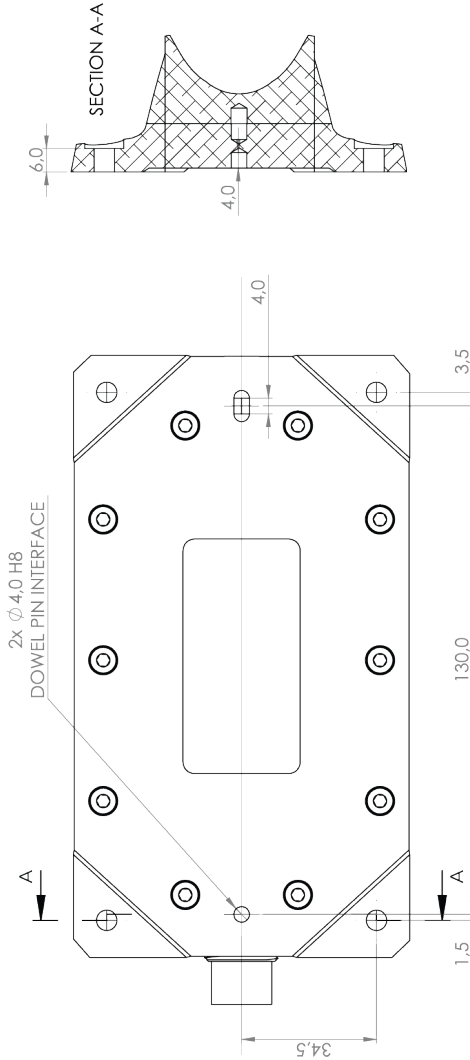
MRU Marine S / MRU Marine HS technical drawings: bottom view.
